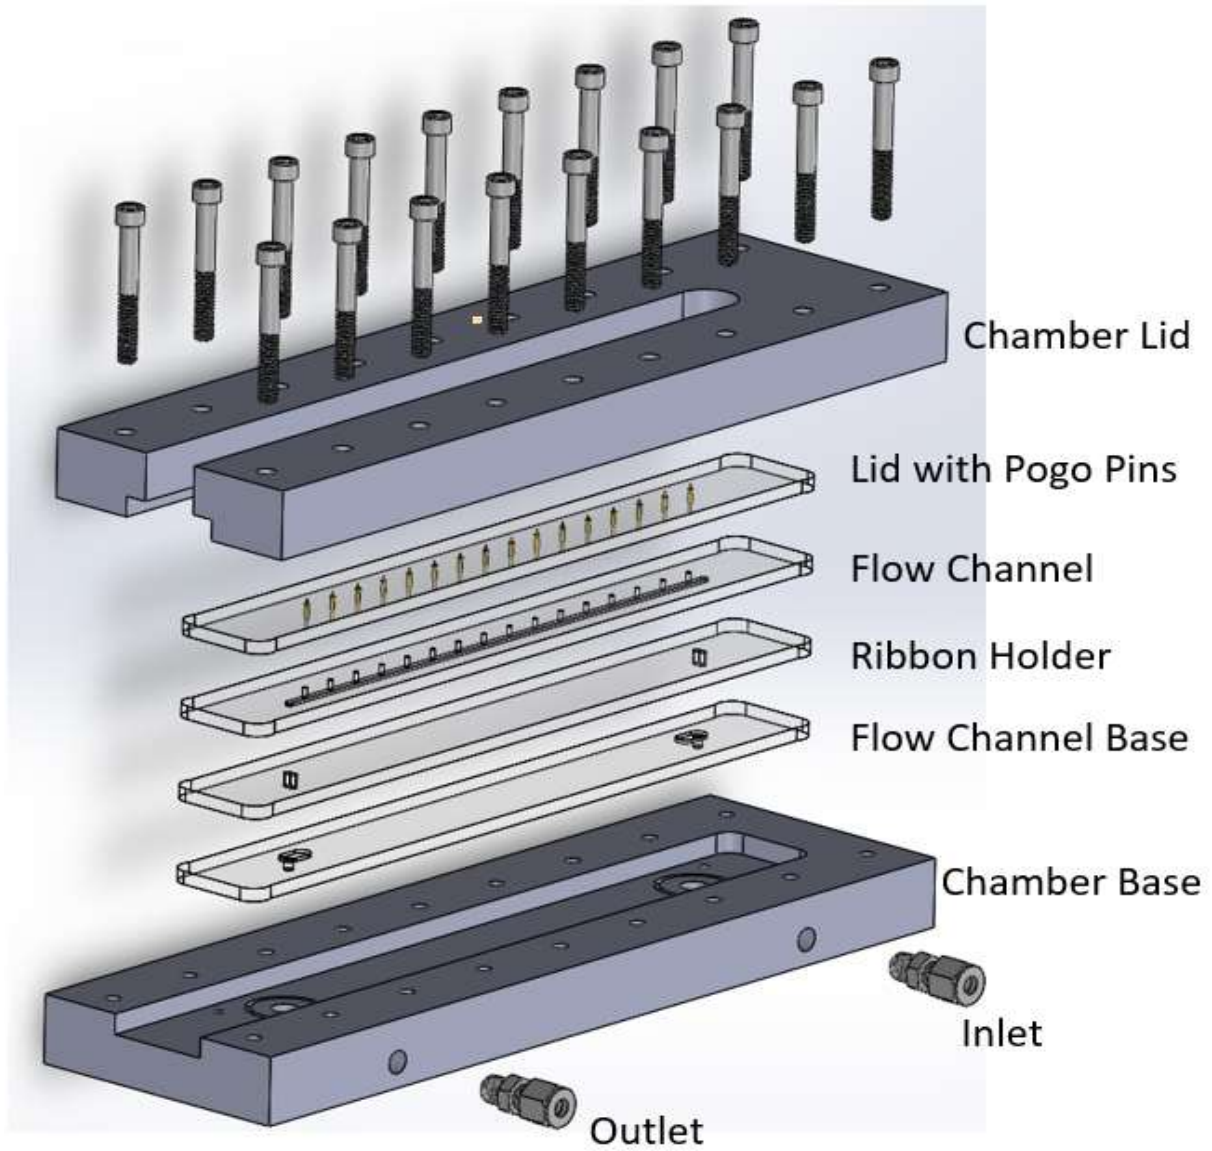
Exploded view of the Dynamic Etch flow channel and clamping structure.
